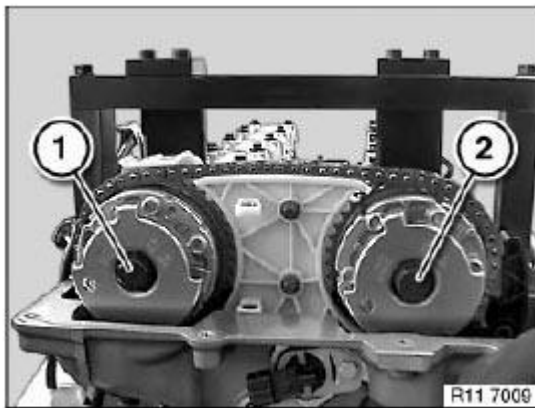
Identifying Inlet Camshaft Central Bolt And Screw
